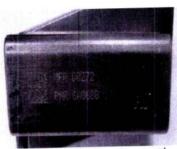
Image of fractured HPC 3rd stage blade part markings
